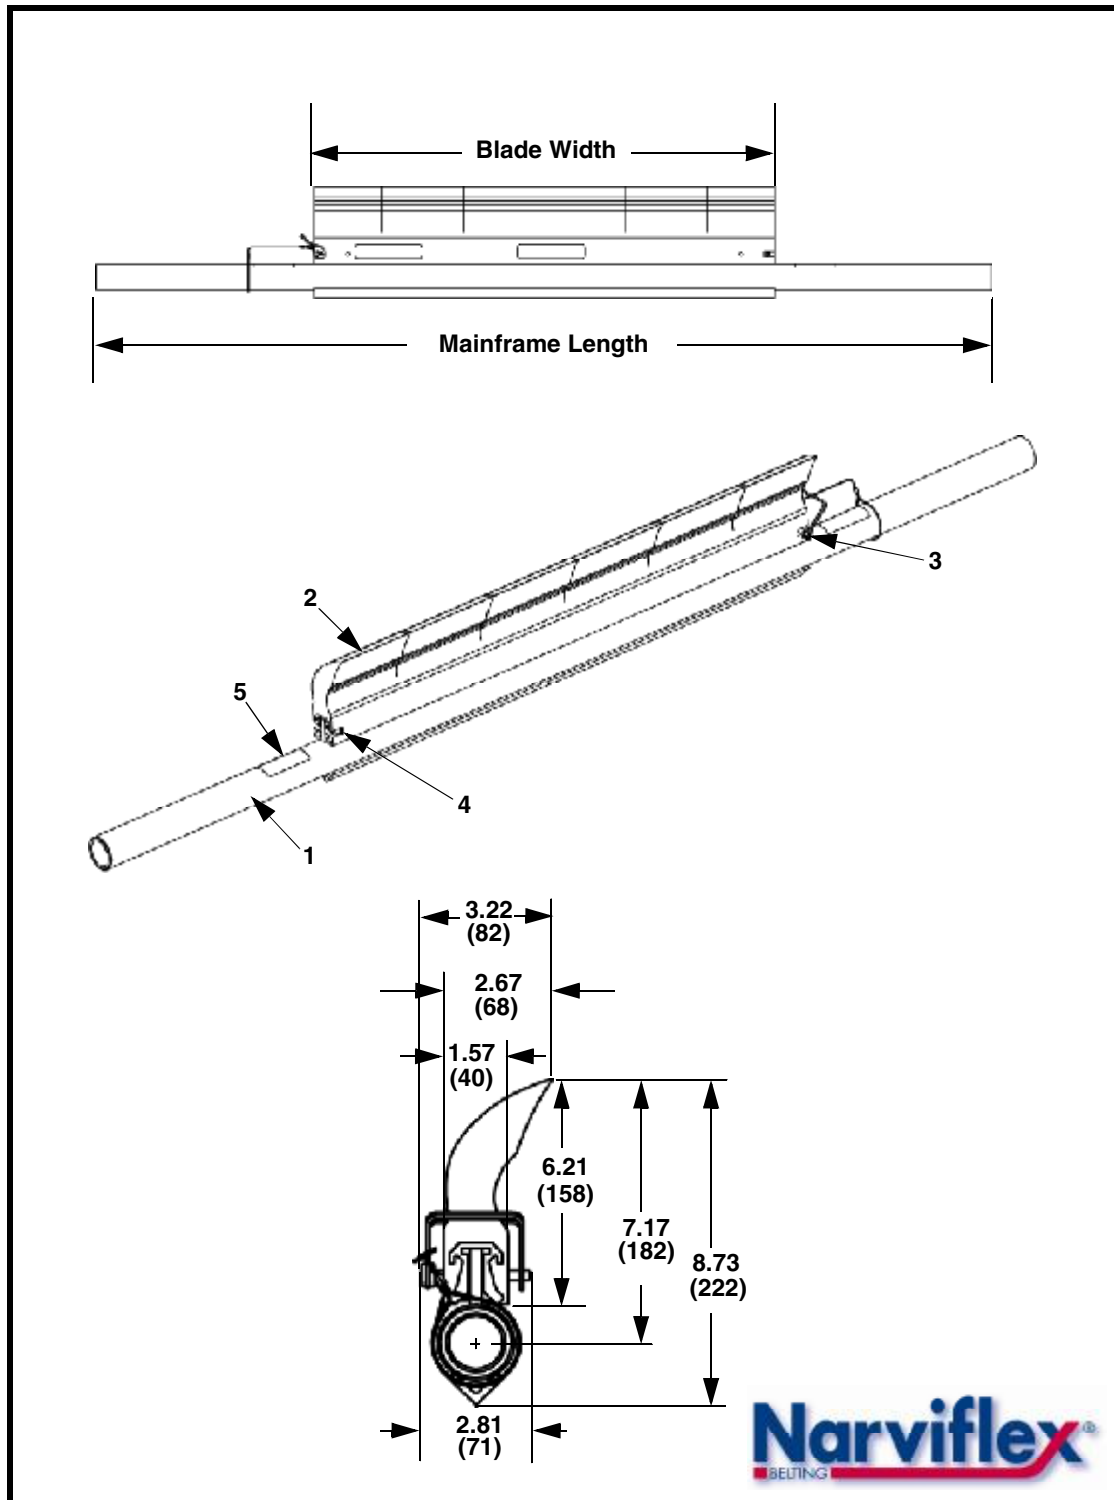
MARTIN® PIT VIPER™ Belt Cleaner Assembly, P/N PV1S-XXXXXXXXXX
